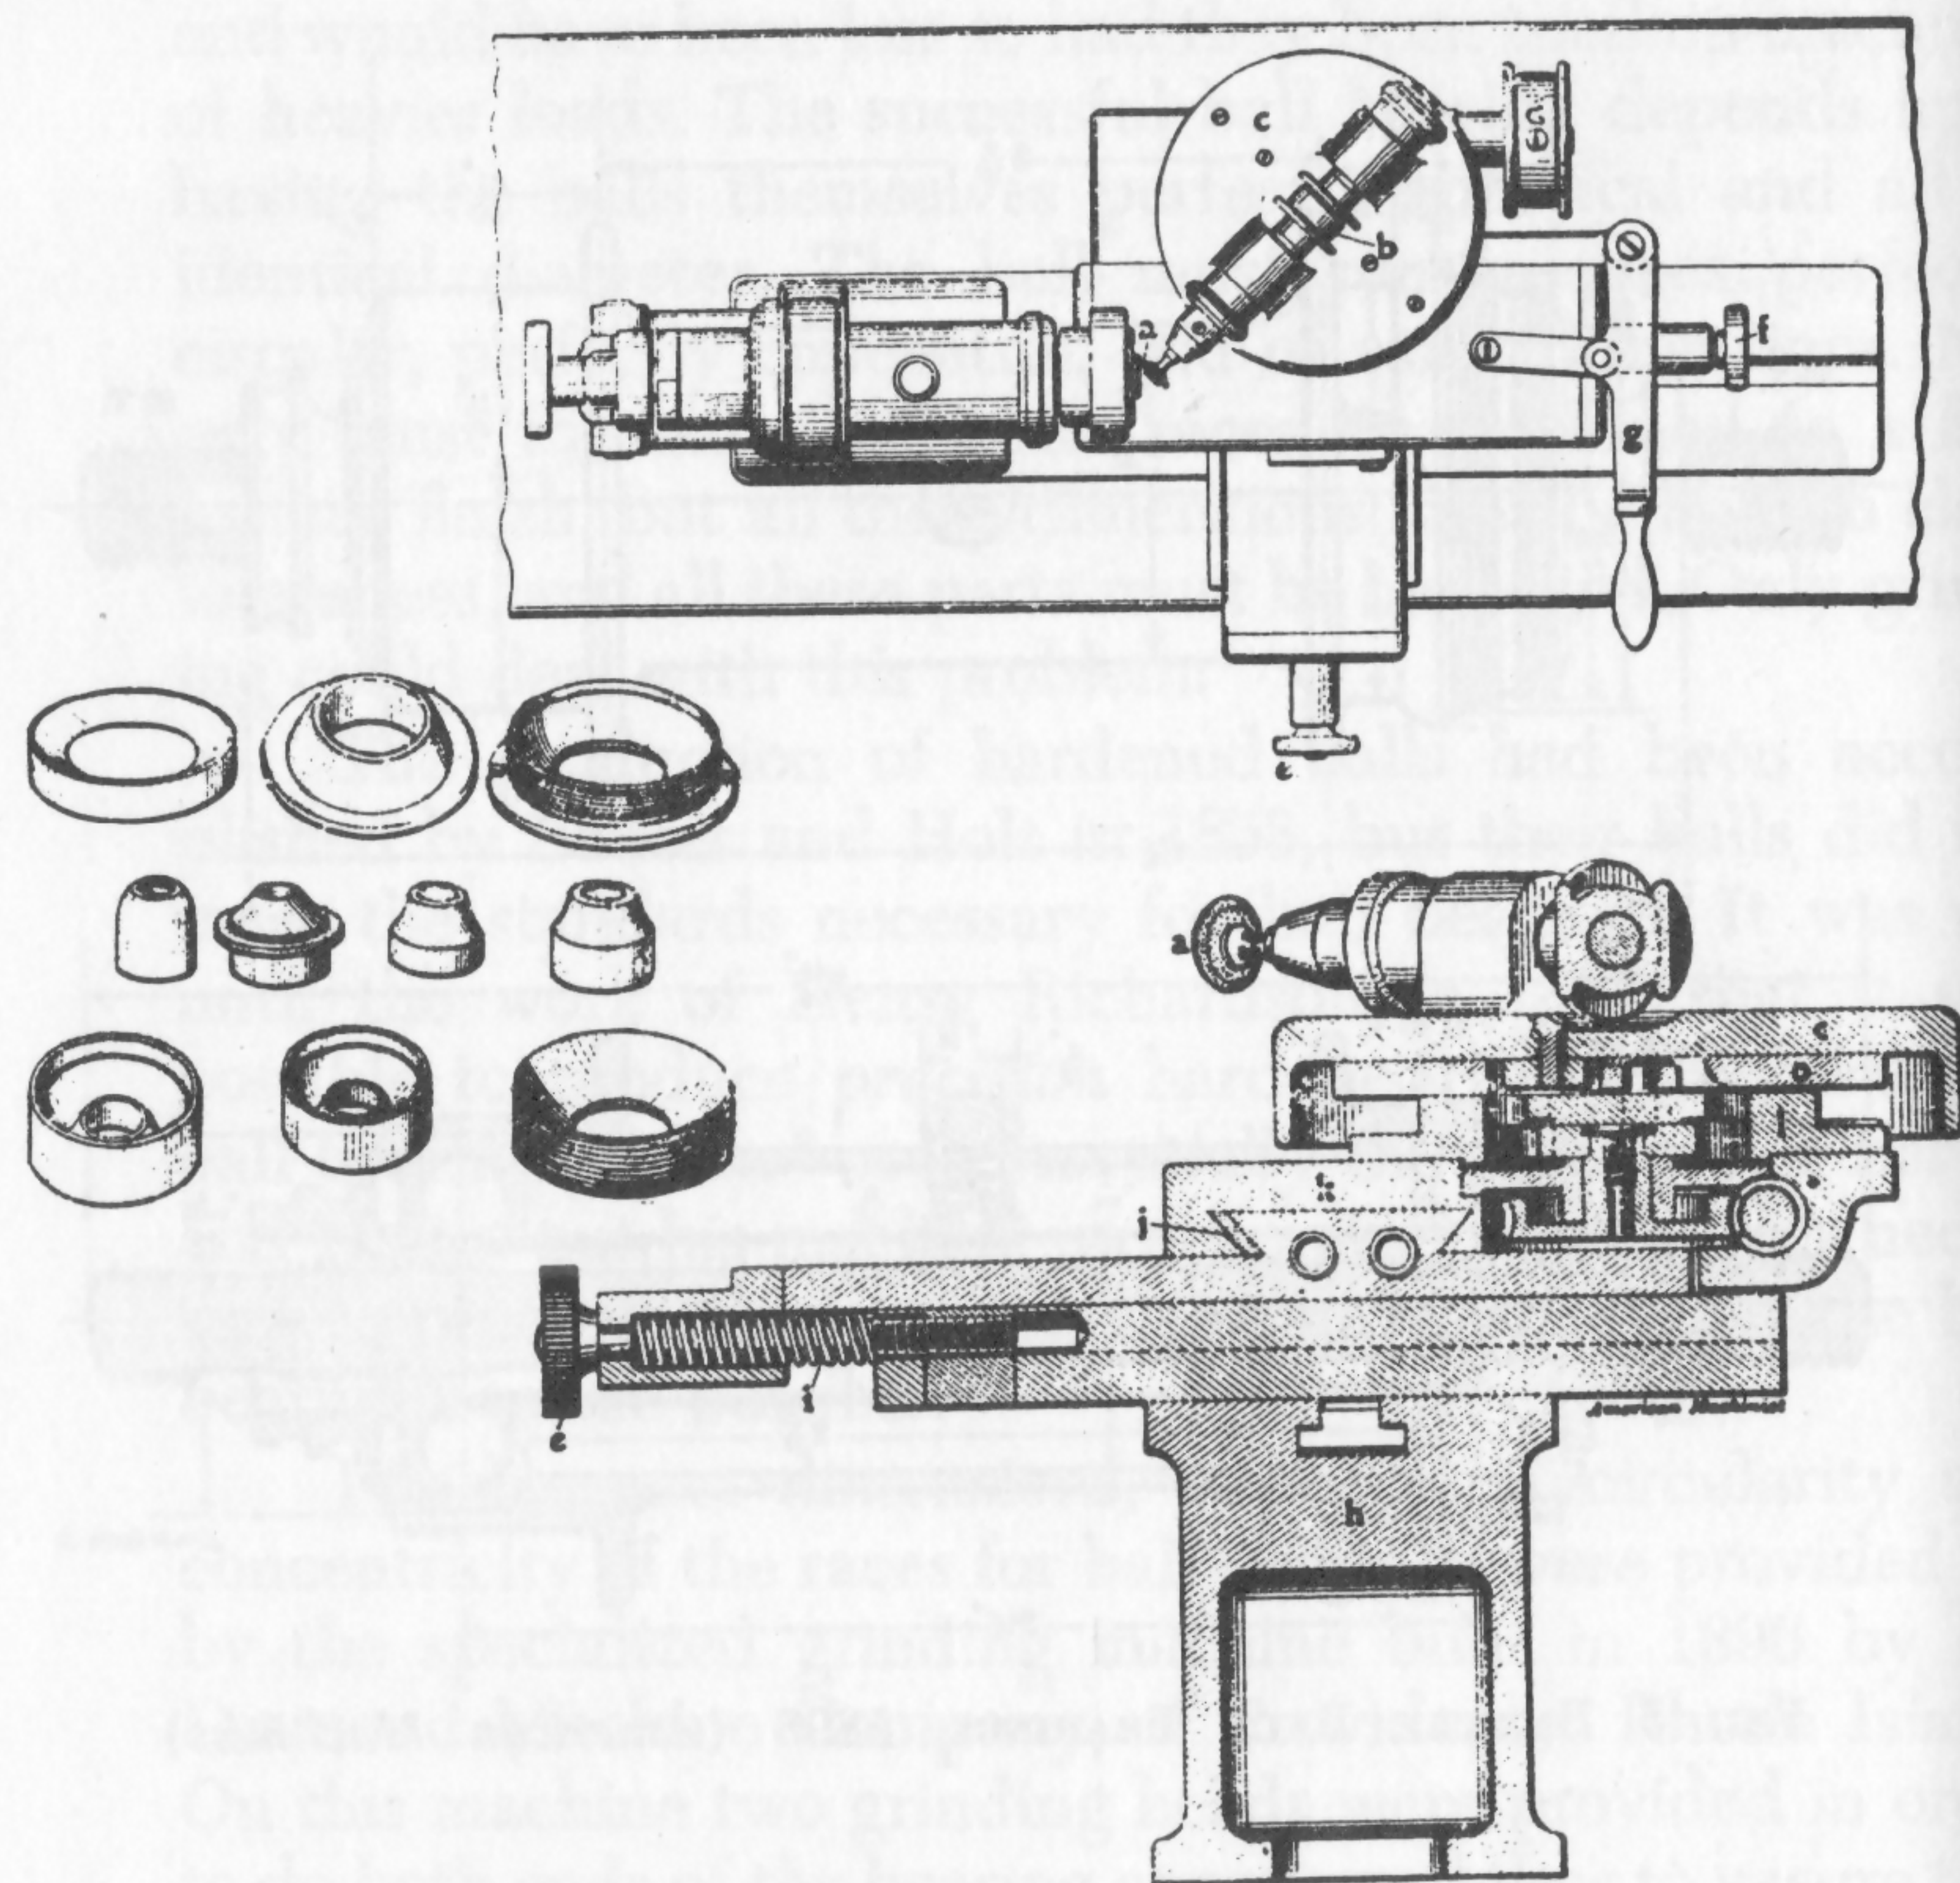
PRATT & WHITNEY BALL BEARING GRINDER, 1899
